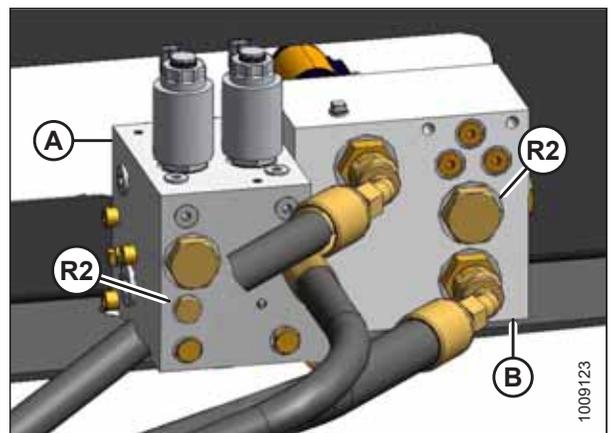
Manifolds without Reverser Valve in Factory Configuration
